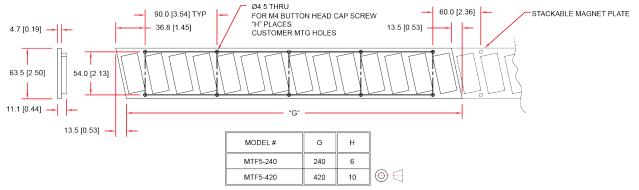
BLMFS5 Mounting Track (MTF5) Dimensions
